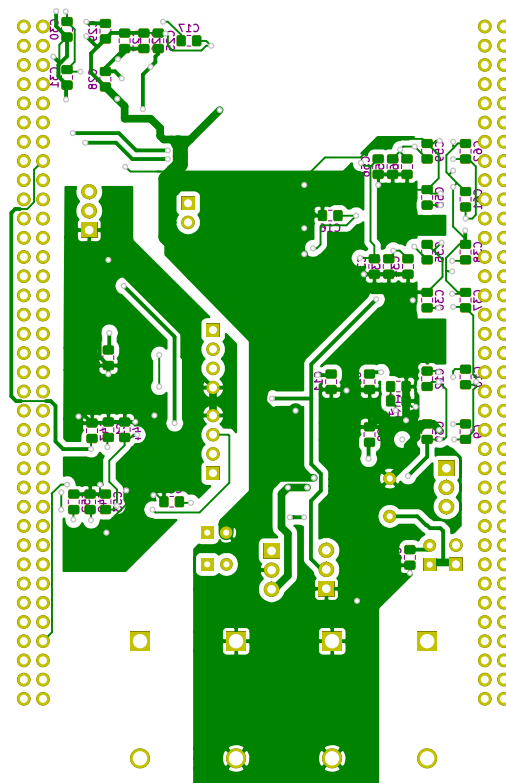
Back of the PCB with Copper Layer, Silkscreen and Mounting Holes
